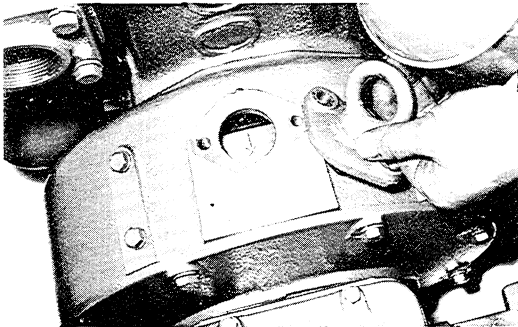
Injection timing and T.D.C. are marked on the flywheel. By removing the cover to which the rear eye bolt is fitted, on top of the flywheel bell housing, these marks are easily visible.
